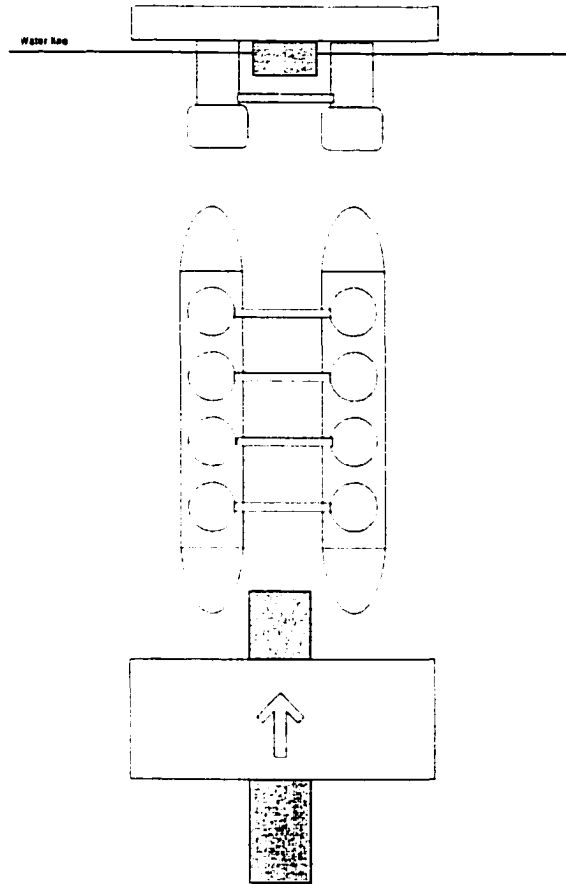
Afloat Assembly of Upper Hull to Lower Hull
